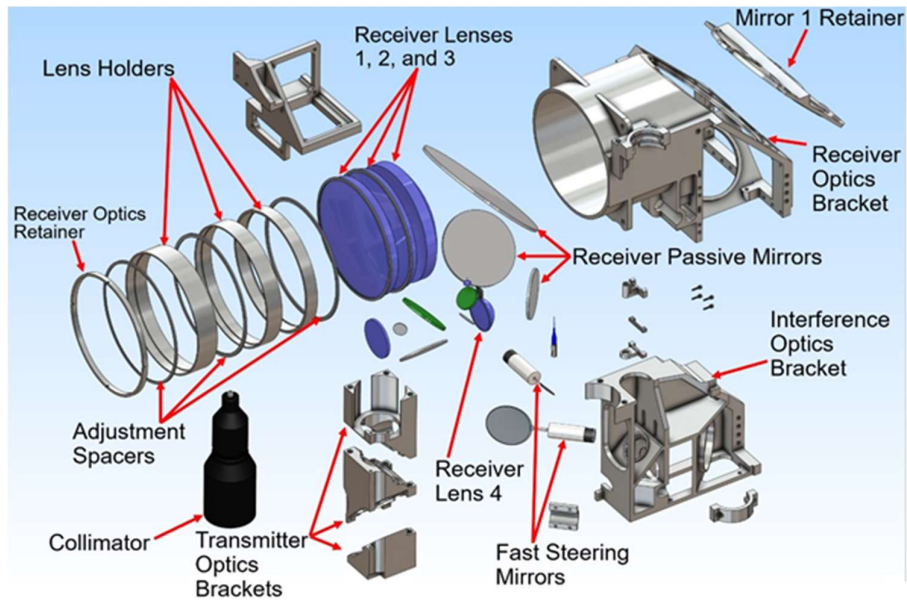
Optical receiver assembly exploded view indicating the individual components.
